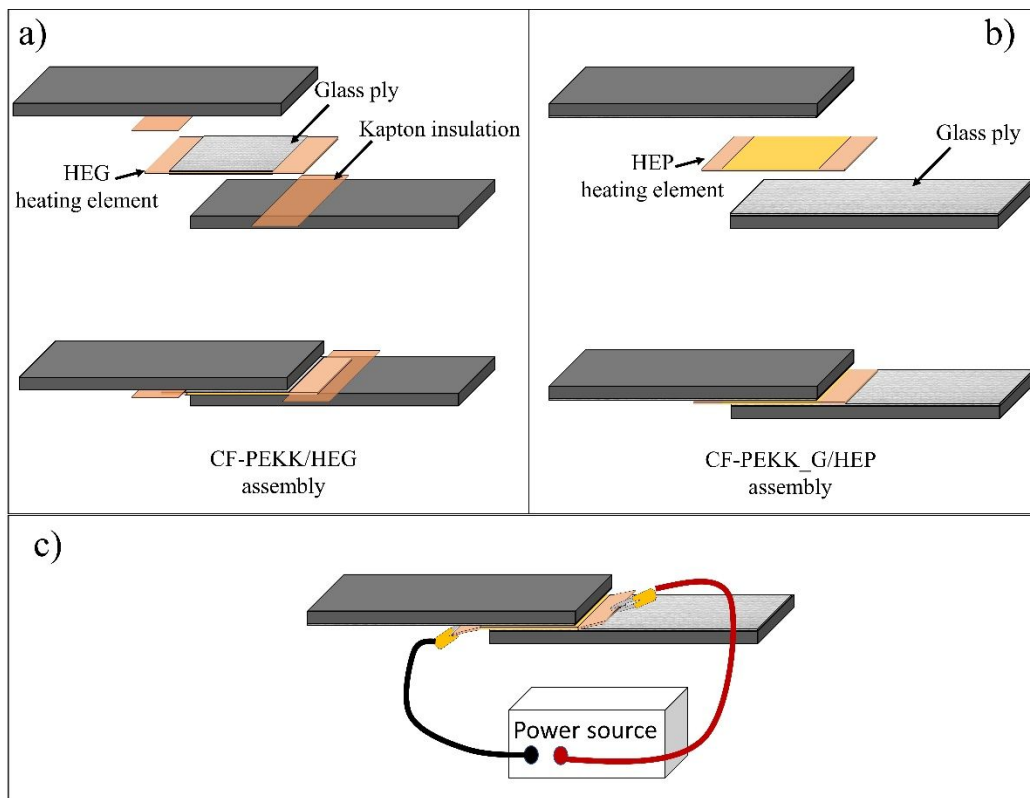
a) and b) Assembly of welding specimens and heating elements to form a single lap sample *for mechanical tests* and c) scheme of power supply connection
